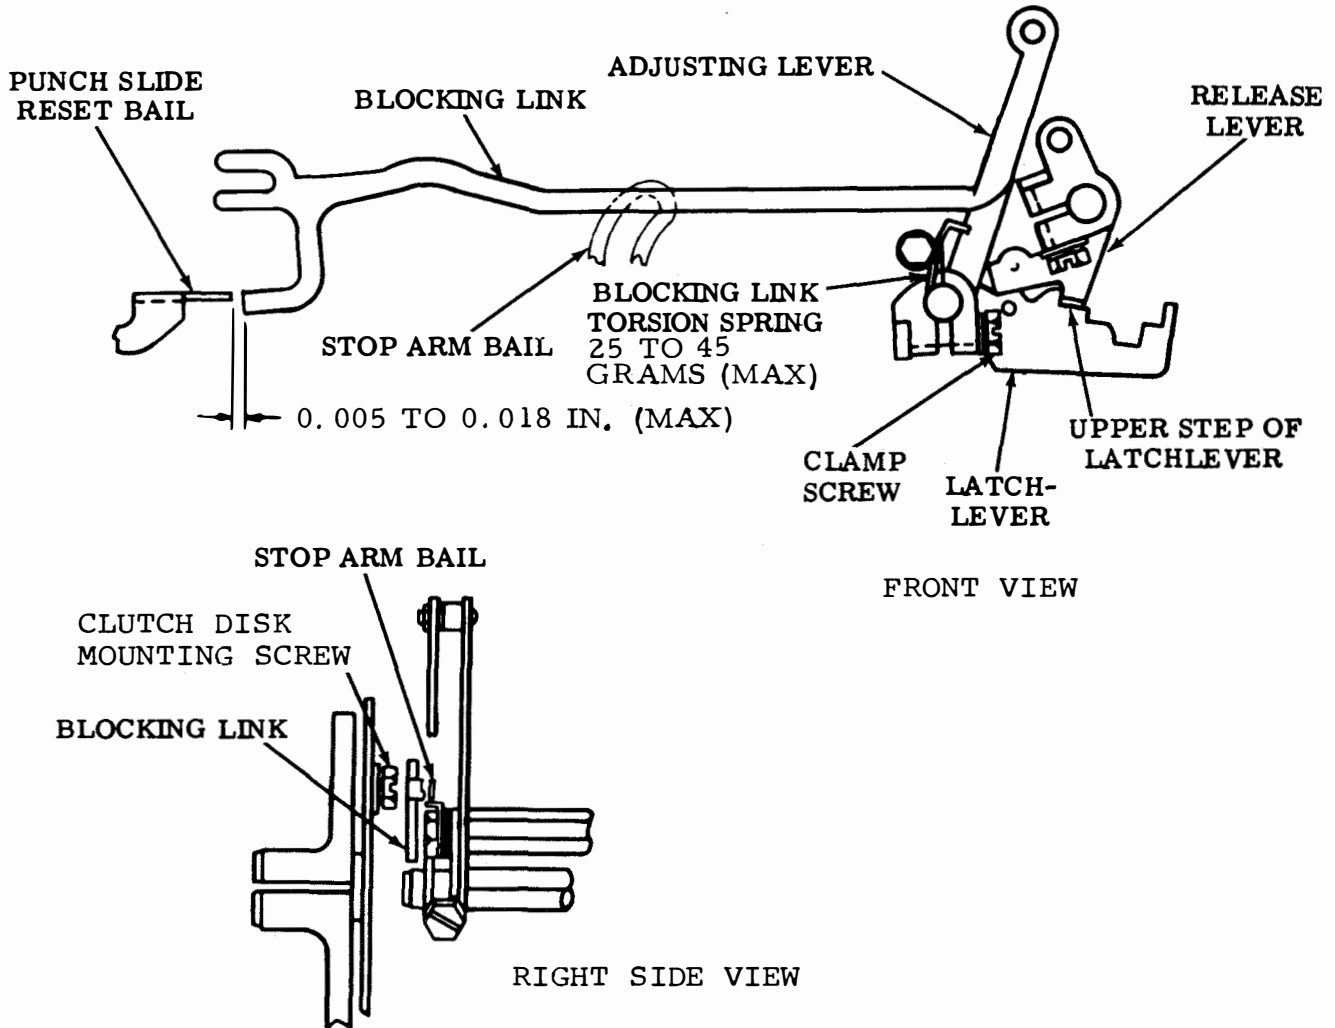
Blocking Link (Horizontal Clearance) and Blocking Link Torsion Spring, Reperforator
